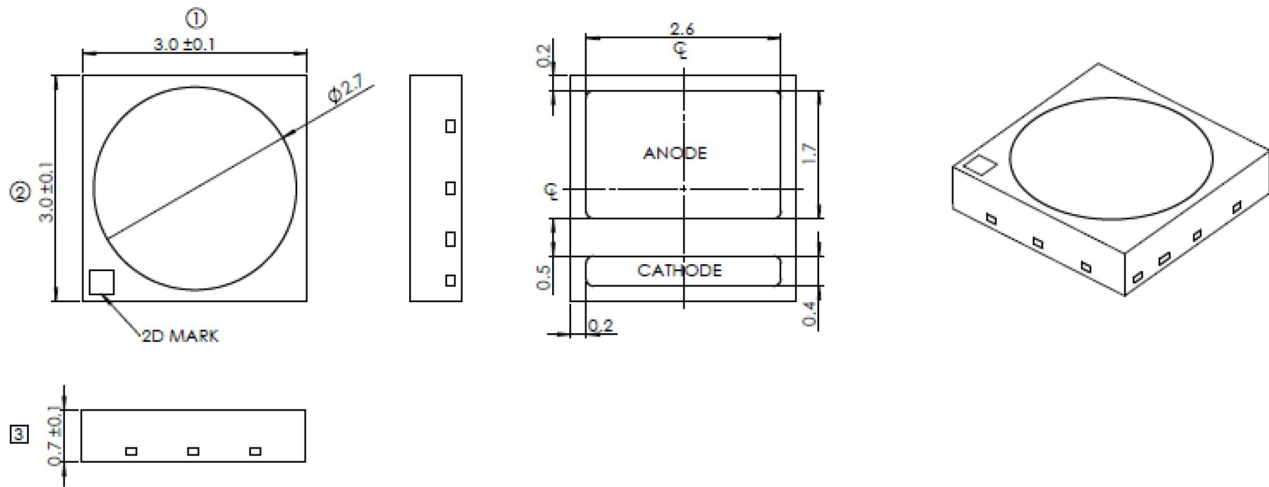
Mechanical dimensions for LUXEON Versat 3030 ST PCA 350
